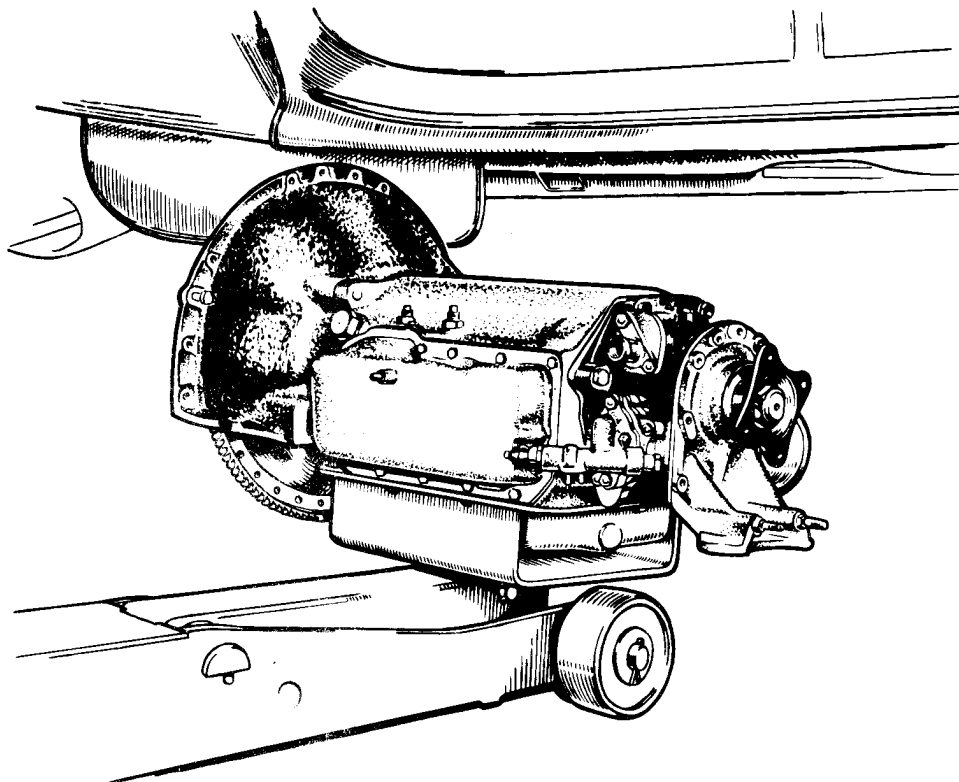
REMOVING GEARBOX FROM UNDERNEATH
